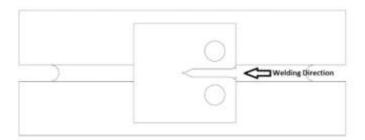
Location of E399 compact tension specimens, CTS, with regard to the welding direction
